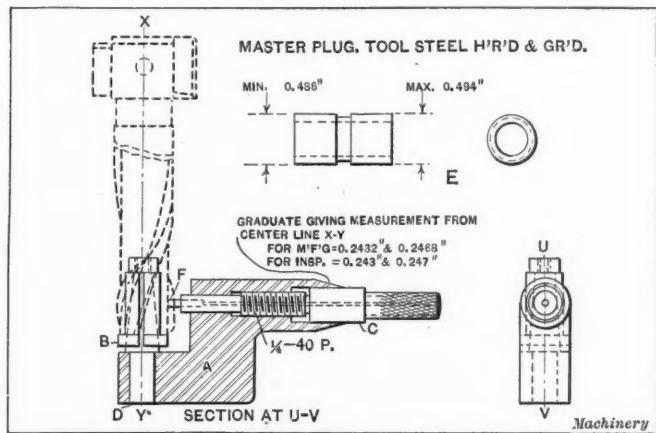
Micrometer Type of Indicating Gage used for testing Rifle Part
